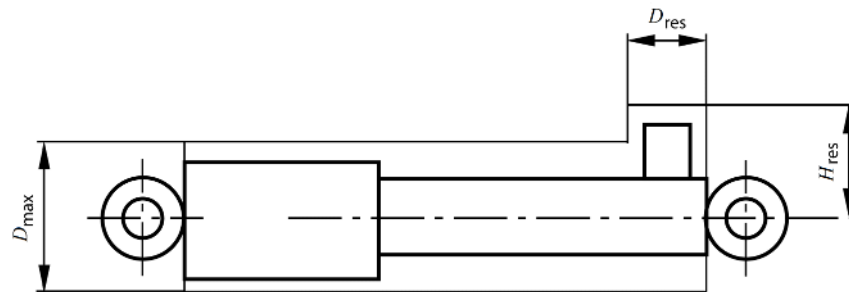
Cross sectional dimensions of damper (D_{max} , D_{res} , H_{res})
